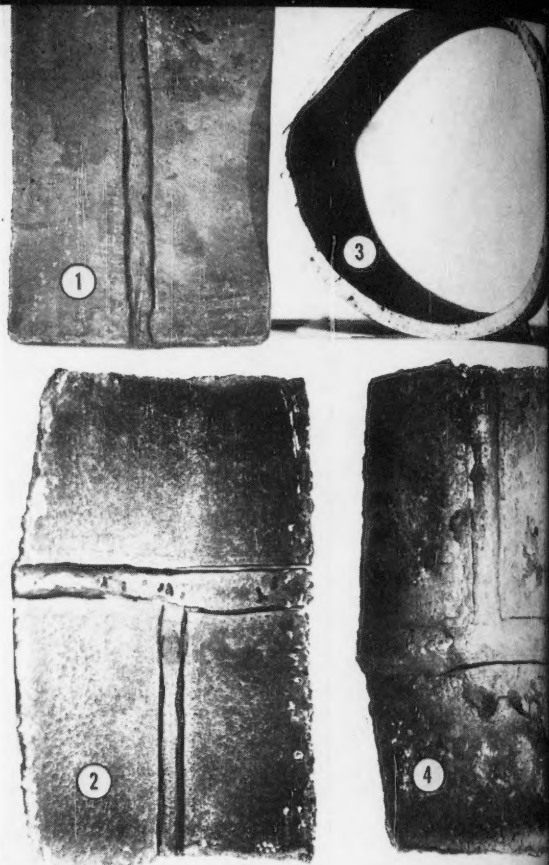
Grooving corrosion attack on welded steel pipe. Figure 2—Pitting of weld metal and grooving corrosion along the longitudinal and circumferential welds. Figure 3—Impingement corrosion produced a U-shaped pattern on this seamless pipe used as an inclined pump column. Figure 4—Welded pipe burst as a result of corrosion along the welds. Severe corrosion also occurred on the outer surface of the pipe.
